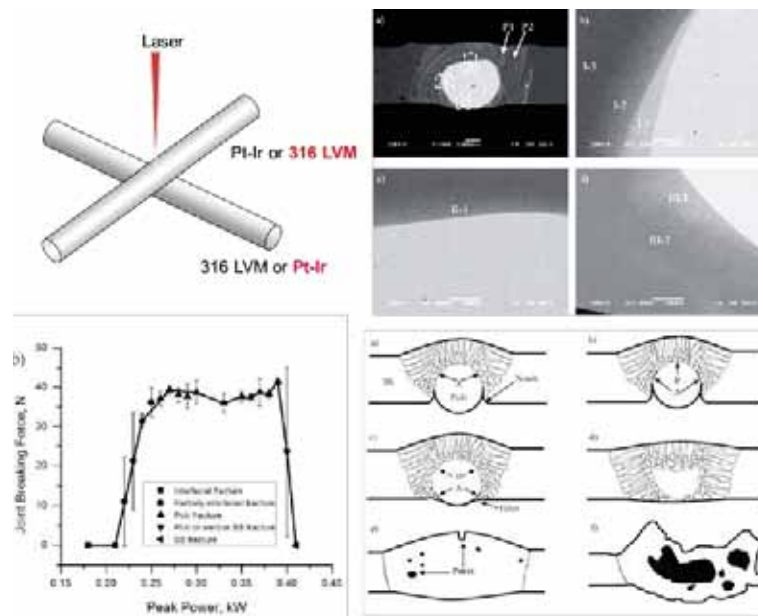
Laser braze welding of Pt to stainless steel[1]
